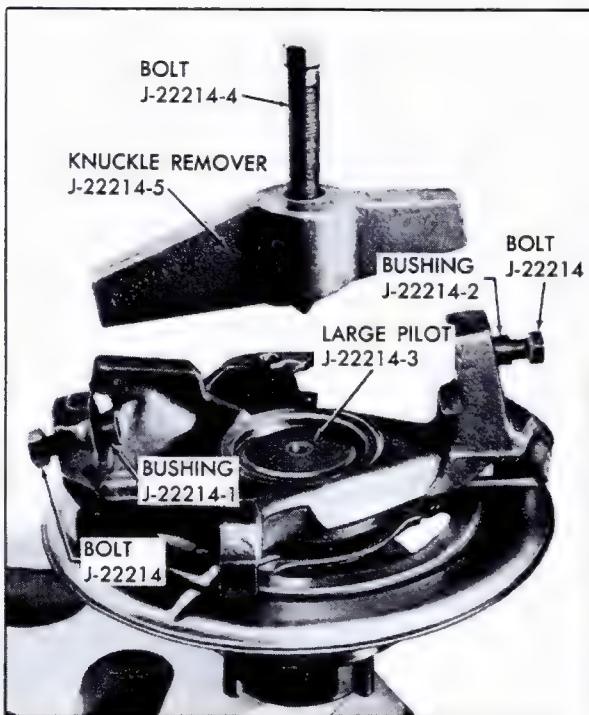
Hub and Bearing Removal Tools (Assembly)
